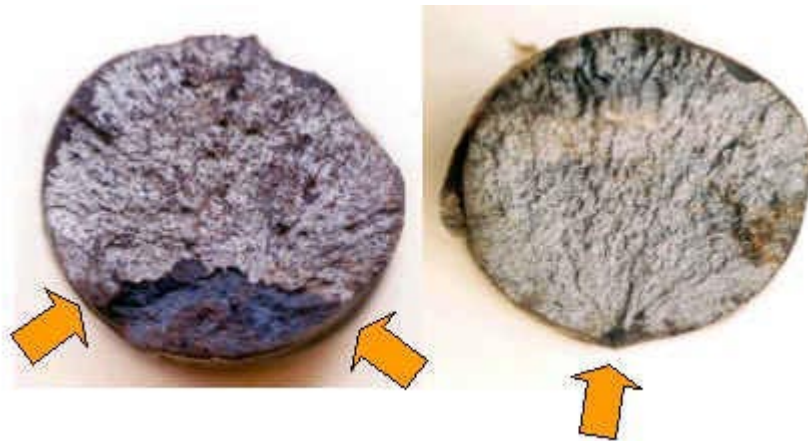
SCC Failure Surfaces – the bolt on the left has a large surface crack before ultimate failure, whereas the bolt on the right has only a very small surface crack that initiated failure.
